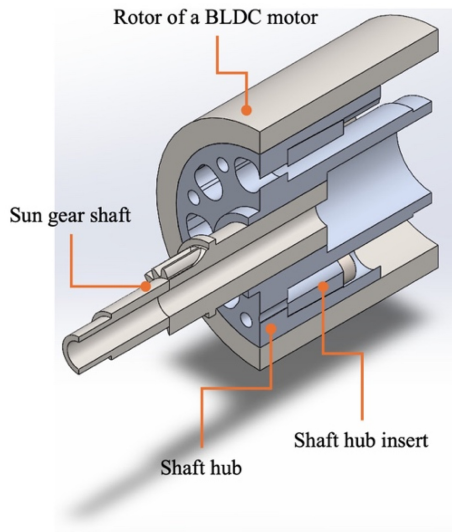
A section view of the rotor assembly which is made up of a rotor of a BLDC motor, a sun gear shaft, a shaft hub and a shaft hub insert
